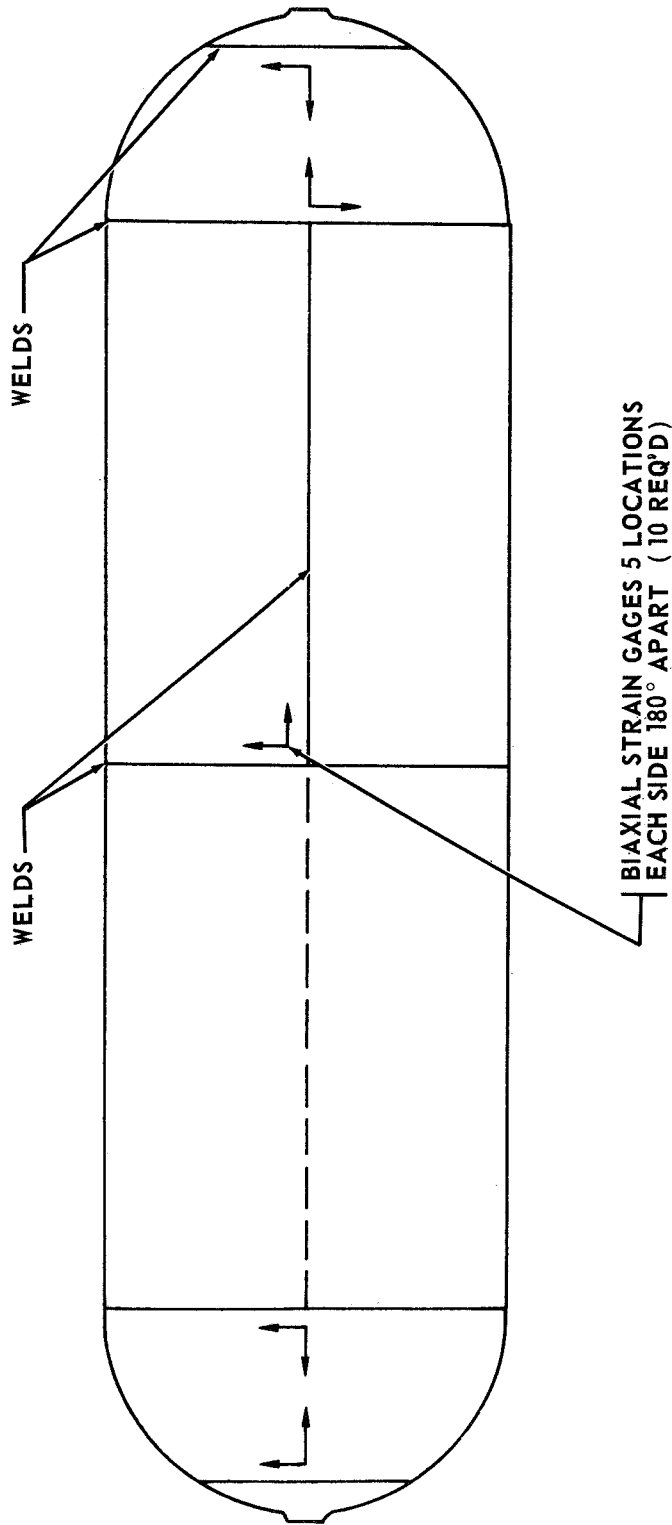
Strain gage locations for rolled and welded pressure vessel S/N 3 and S/N 4.
